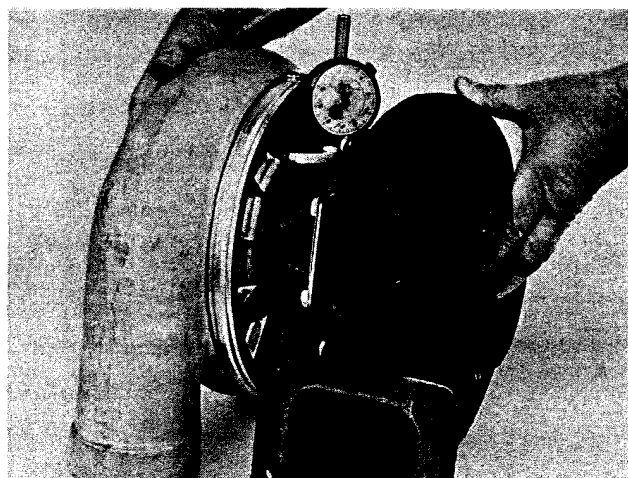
, (TA-46). Checking bearing radial clearance of T-18A
